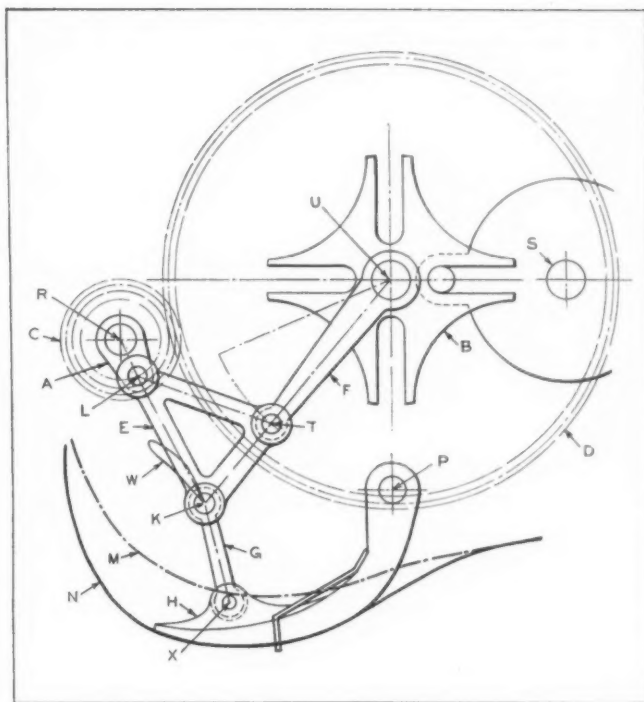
Geneva Stop Motion Link and Gear Mechanism for Indexing Motion Picture Film
